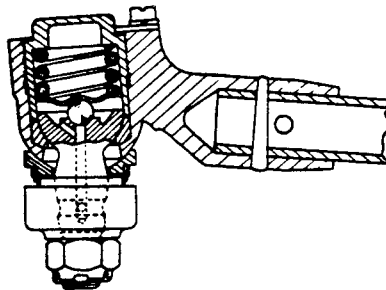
Section through a ball joint (outer) of a cross steering tube.
